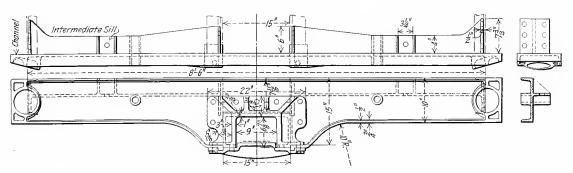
Cast Steel End Sill for Freight Cars. Pittsburgh Equipment Company.
